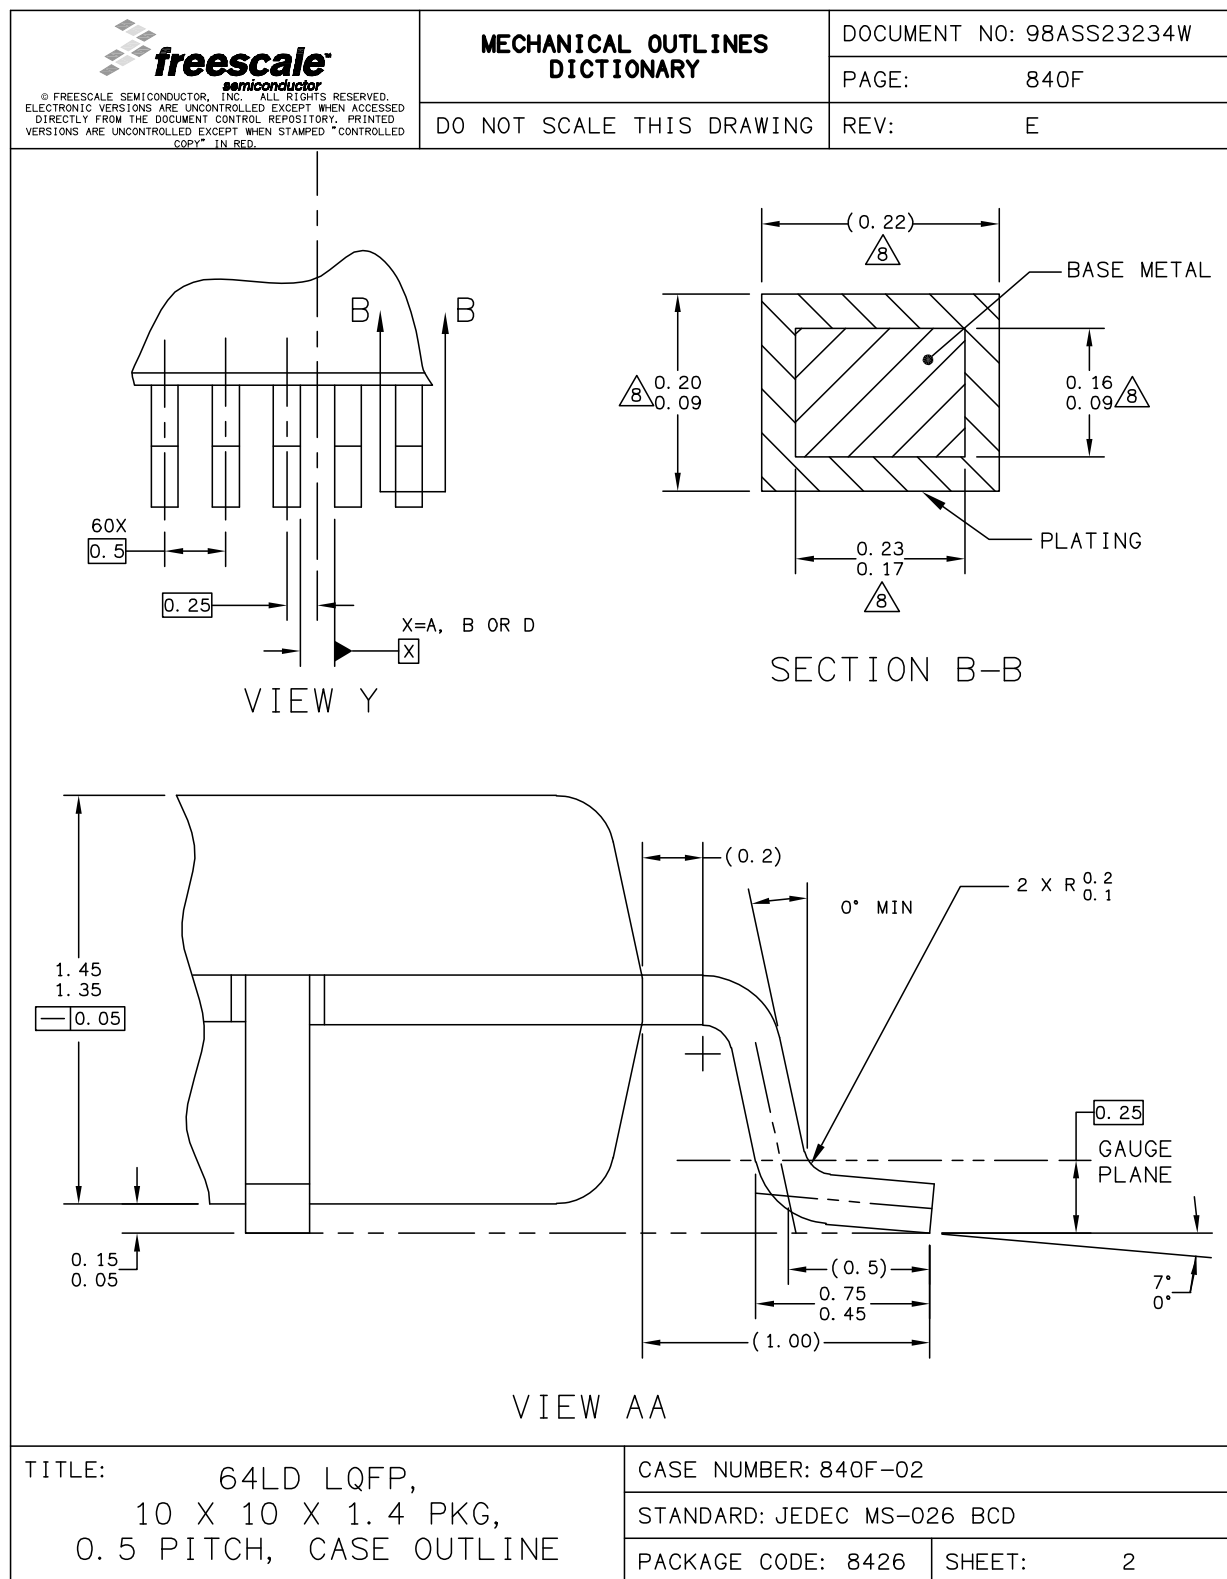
64 LQFP package mechanical drawing (2 of 3)
